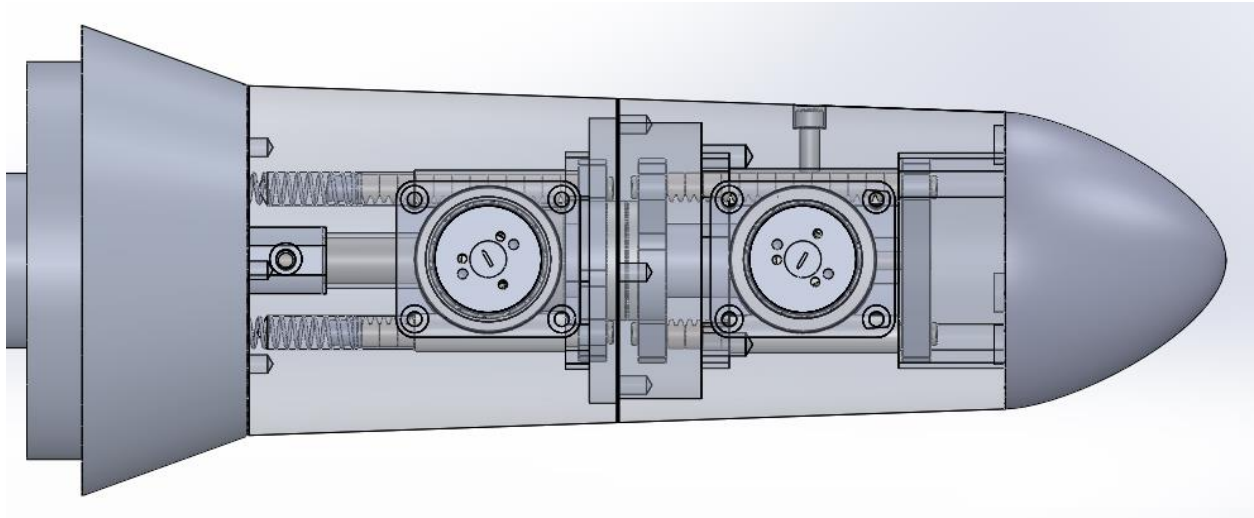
The hub assembly is located at the back of the submarine. The propeller blades attached to this assembly.
